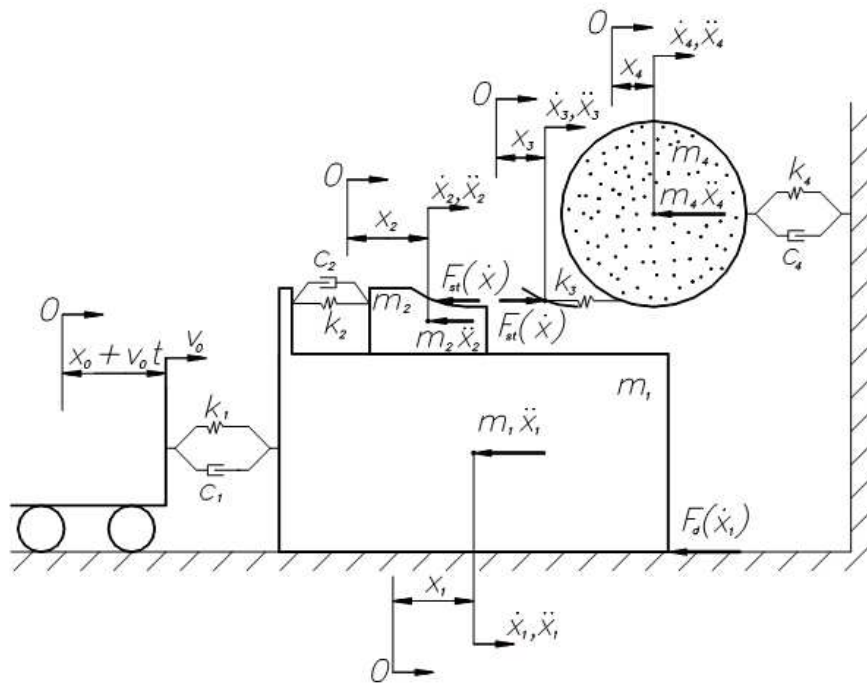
One-way physical model of three-mass system: grinder table – workpiece – grinding wheel
